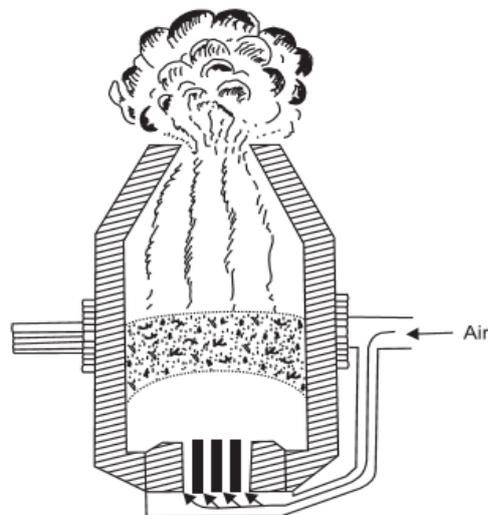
Bessemer Converter for the Manufacture of Steel
